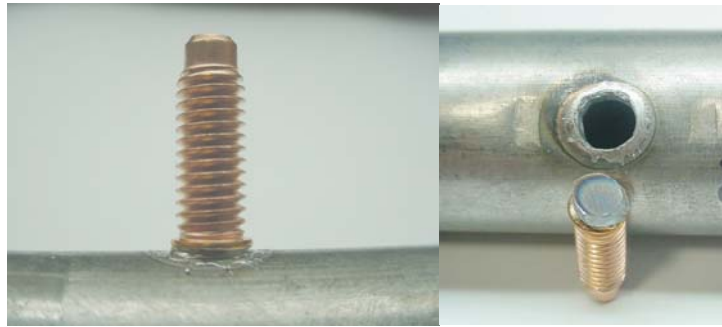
Small-flanged stud welded to an air bag inflator
